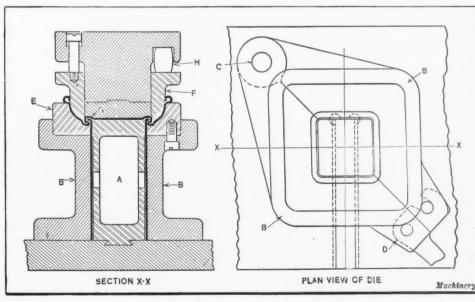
Hinged Die employed in assembling the Bottom to the Grinder Body
